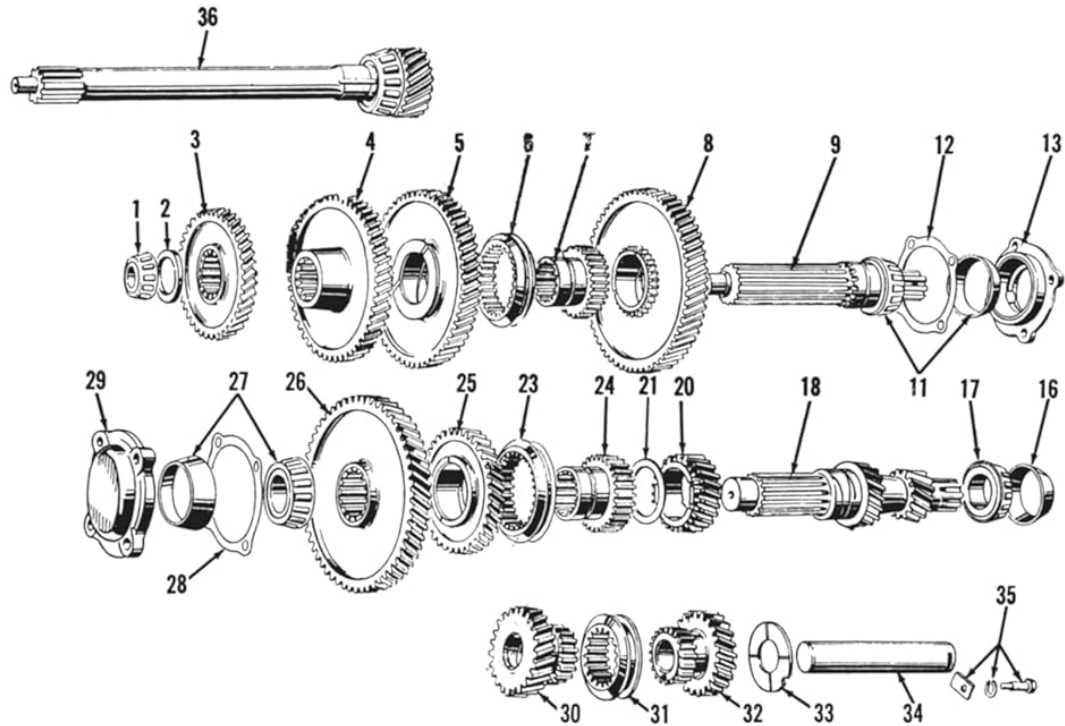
TE20 transmission shafts, gears, and components. Gears (8 & 20) rotate on bronze bushings.
